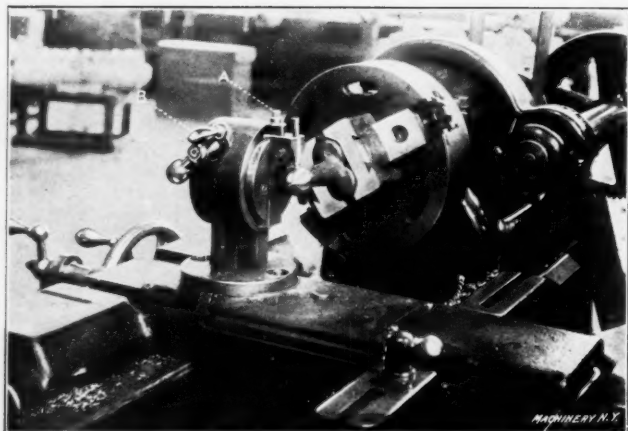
Attachment for Turning Spherical Ends of Different Diameters for Ball-and-socket Joints
